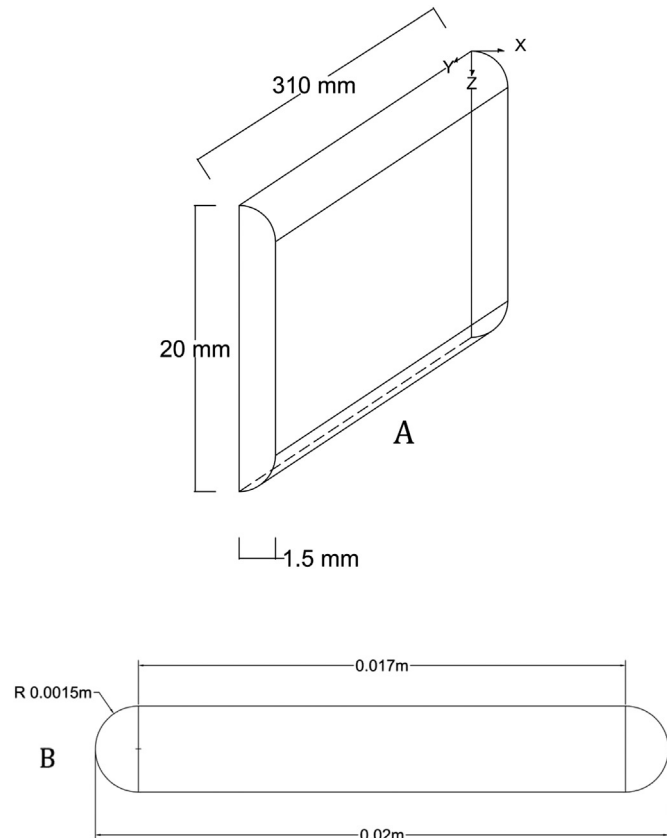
Dimensions of flat tube used in this study [1] A) side view, B) top view.
